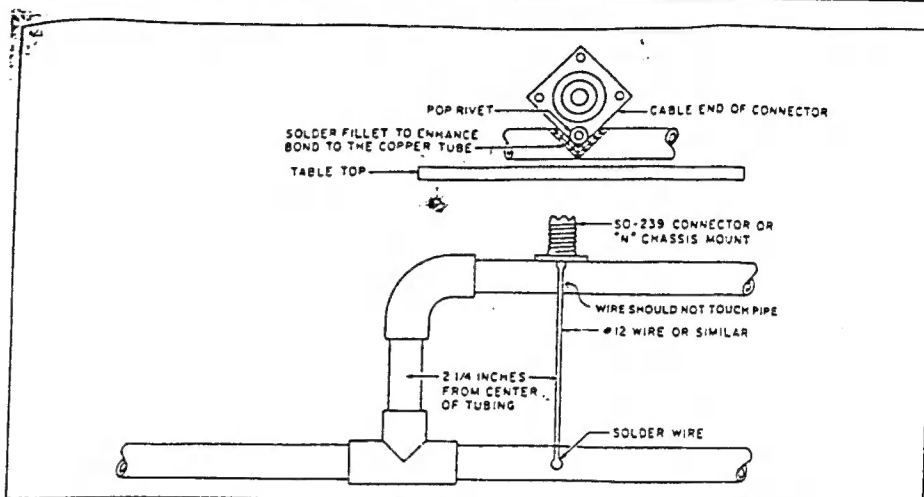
See the materials list. Before soldering, clean the joints and place the assembled antenna on a flat, noninflammable surface. Practice on some scraps of tubing and extra pipe joints if you're new to this. All dimensions are center-to-center.
